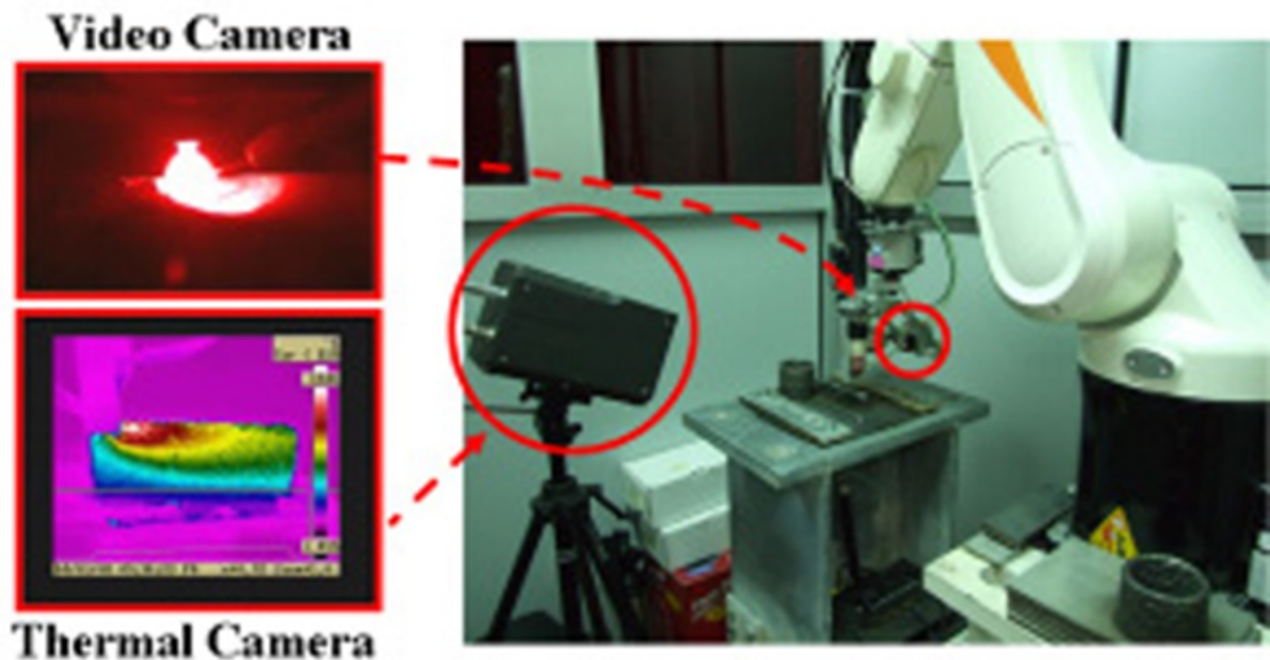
9 The industrial robot with TIG welding equipped with sensors and camera
